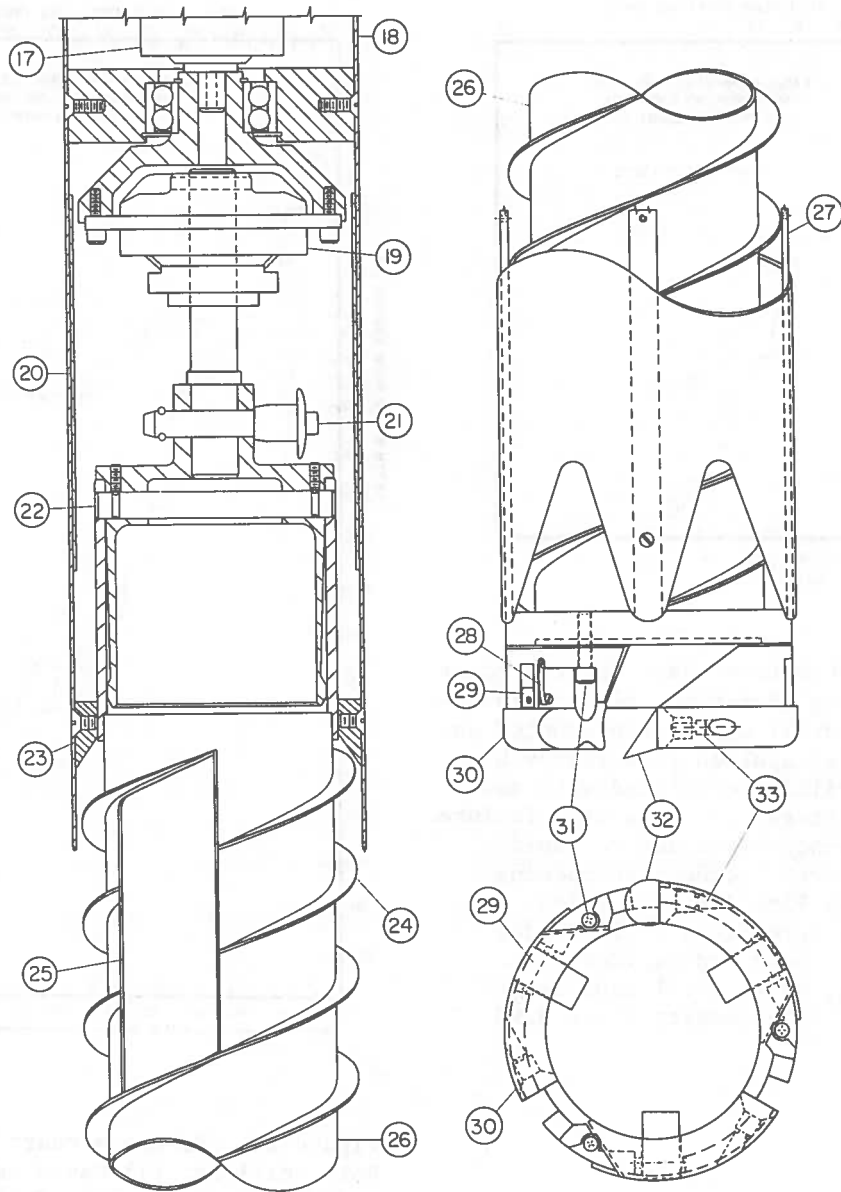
(continued). (18) Outer barrel (0.165 cm x 13.97 cm x 262.9 cm stainless steel). (19) Torque limiter (Morse 350A-1). (20) Rotary cover on release pin access hole. (21) Quick release pin. (22) Core barrel release pin. (23) Nylon bearing ring and chip seal. (24) Stainless steel spiral of 22 cm pitch. (25) Ice cuttings inlet port. (26) Core barrel (0.165 cm x 10.8 cm x 218.1 cm type 304 stainless steel). (27) Core cuttings elevator strips and spiral bearing surface (brass, screwed to outer barrel). (28) Core breaker spring. (29) Core breaker (1.9 cm x 3.2 cm). (30) Shoe for mounting cutters and core breakers. (31) Cap screw attachment of shoe onto core barrel flange. (32) Oval type cutters. (33) Cap screw attachment of cutter into shoe.
